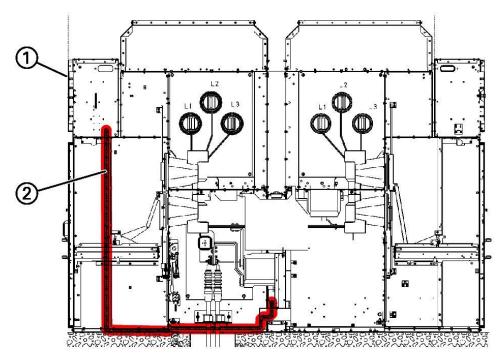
Laying of low-voltage cables, with view onto panel A (1), left inner side of panel
